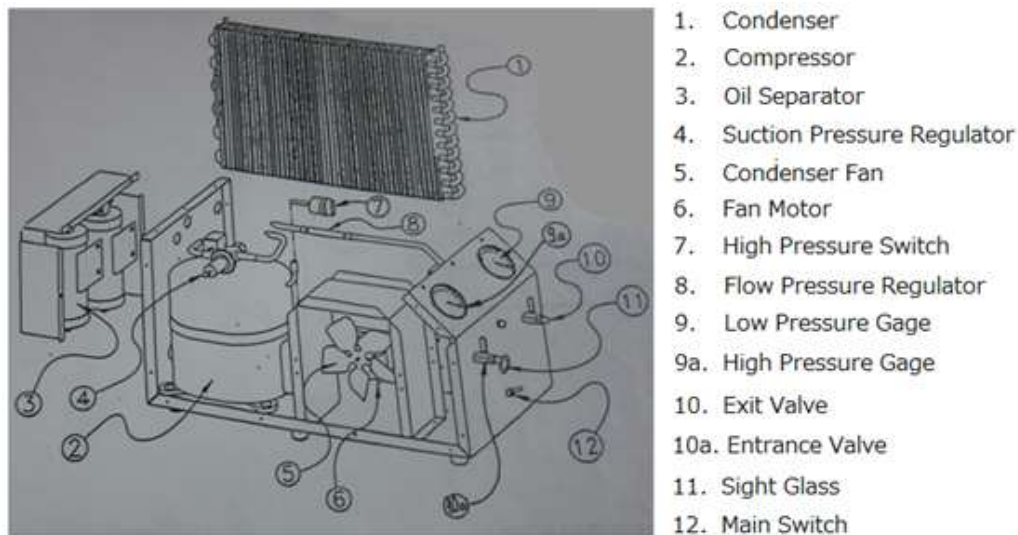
Assembly Drawing of Refrigerant Recovery Machine with Parts Lists
